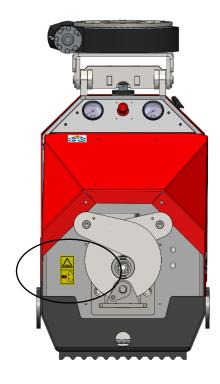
LOCATION WARNING ROTATING PARTS
